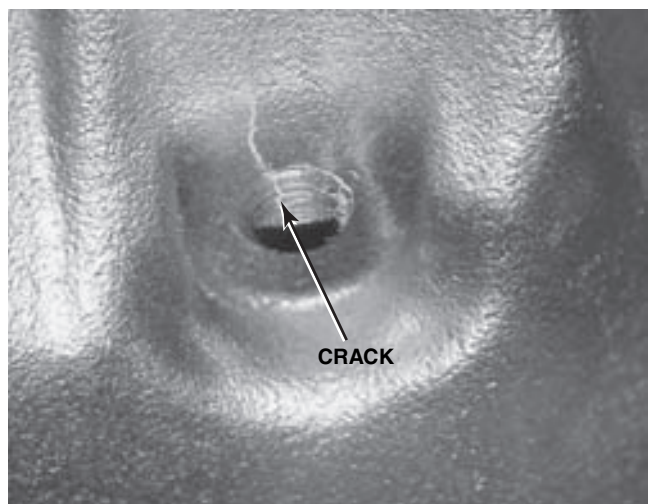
This crack in a vintage Ford 289, V-8 block was likely caused by the technician using excessive force trying to remove the plug from the block. The technician should have used heat and wax, not only to make the job easier, but also to prevent damaging the block.
